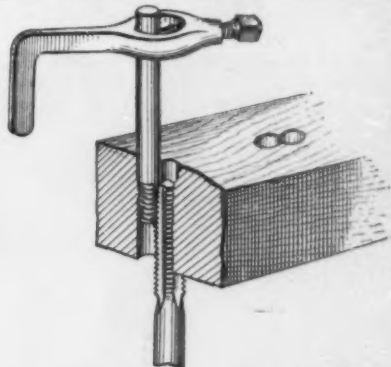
CUTTING A LEFT-HAND THREAD WITH A RIGHT-HAND TAP.
